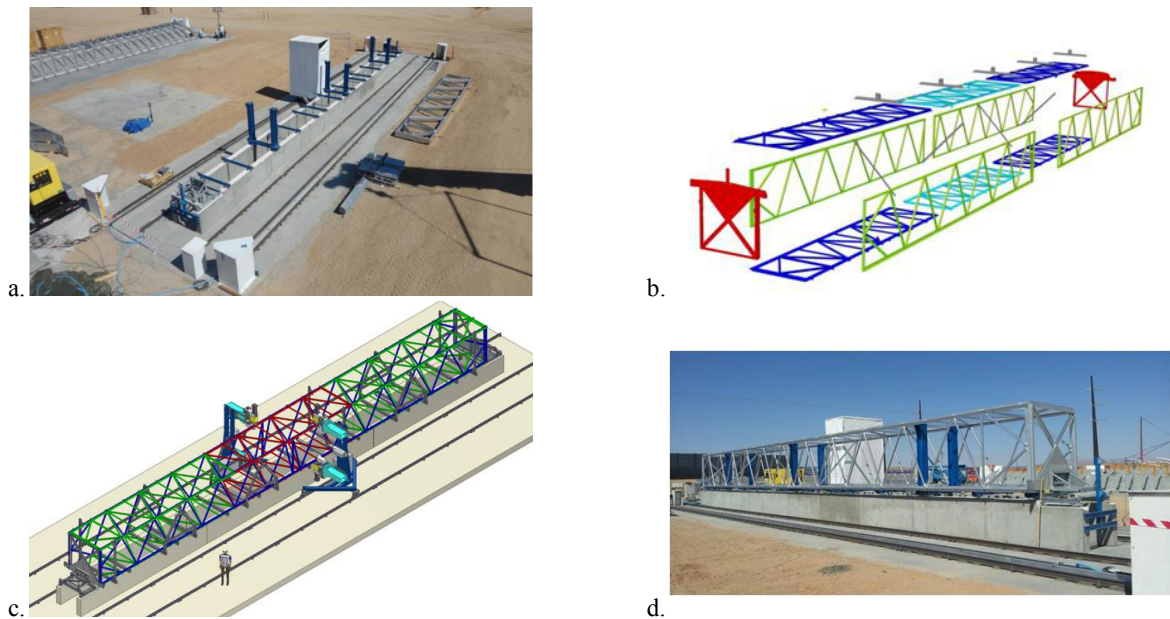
Assembly process in the Box Jig: a. Box Jig; b. representation of the frame elements to be assembled in the jig; c. clinching tools move along the Box Jig; d. assembled box in the jig
